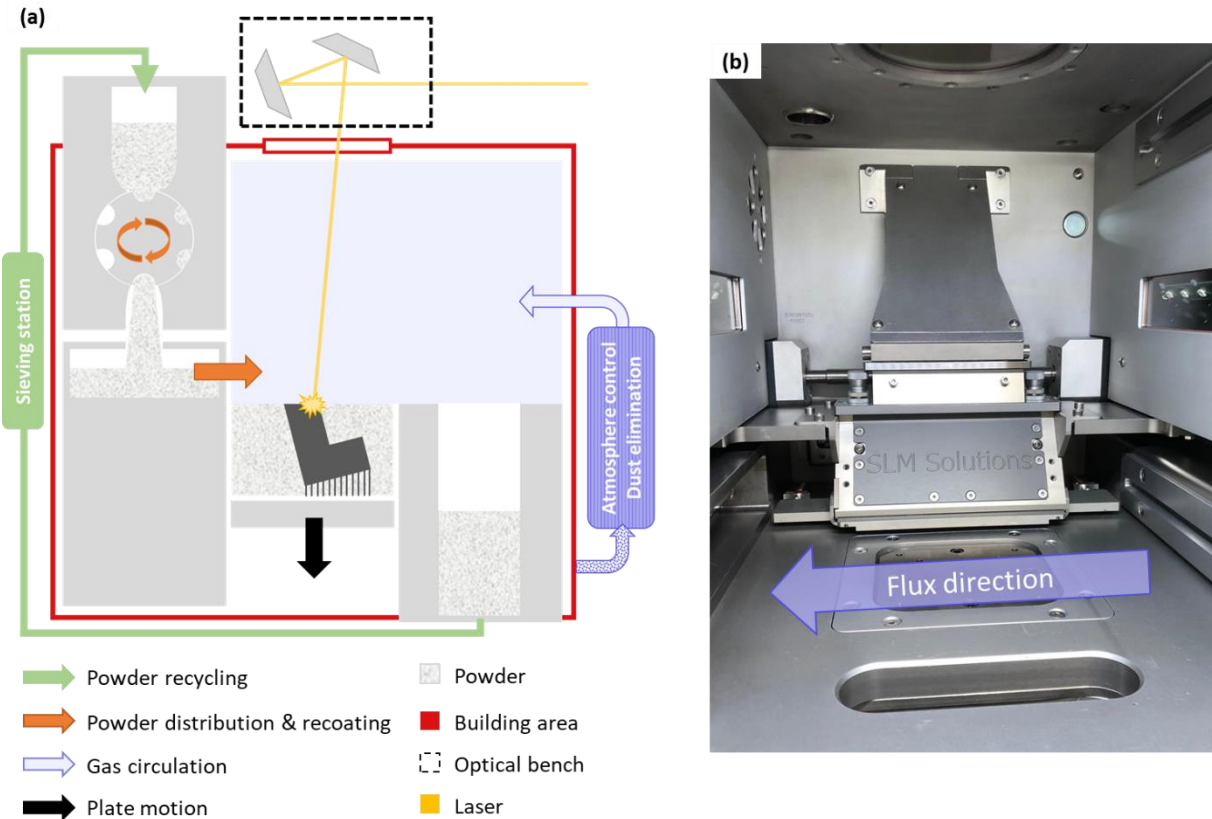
Presentation of the SLM 125 HL machine used to produce L-PBF specimens
